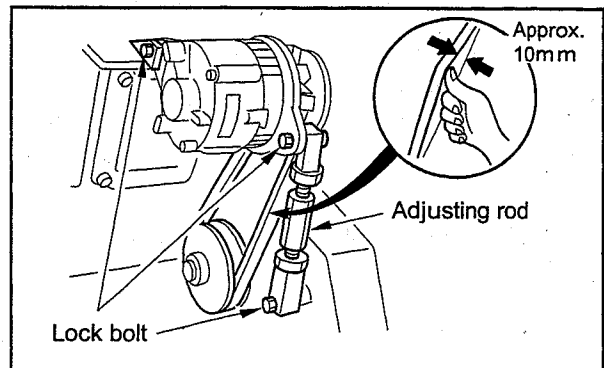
Inspecting the V-belt and adjusting the belt tension
